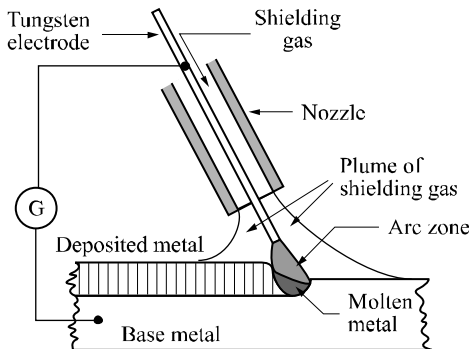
TIG (*tungsten inert gas*) welding
